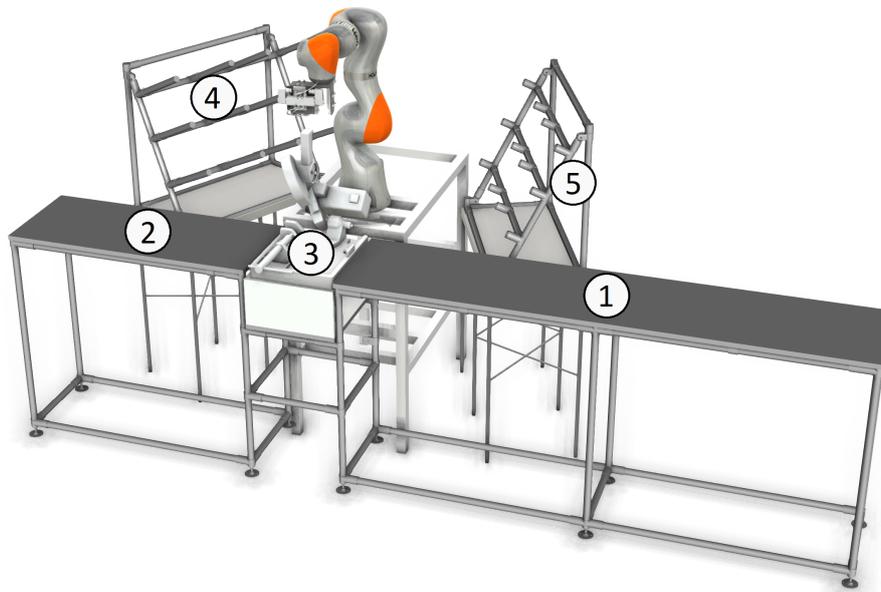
Layout including robot, mount, gripper, workbench, cutting machine, kitting rack, and buffer rack.
